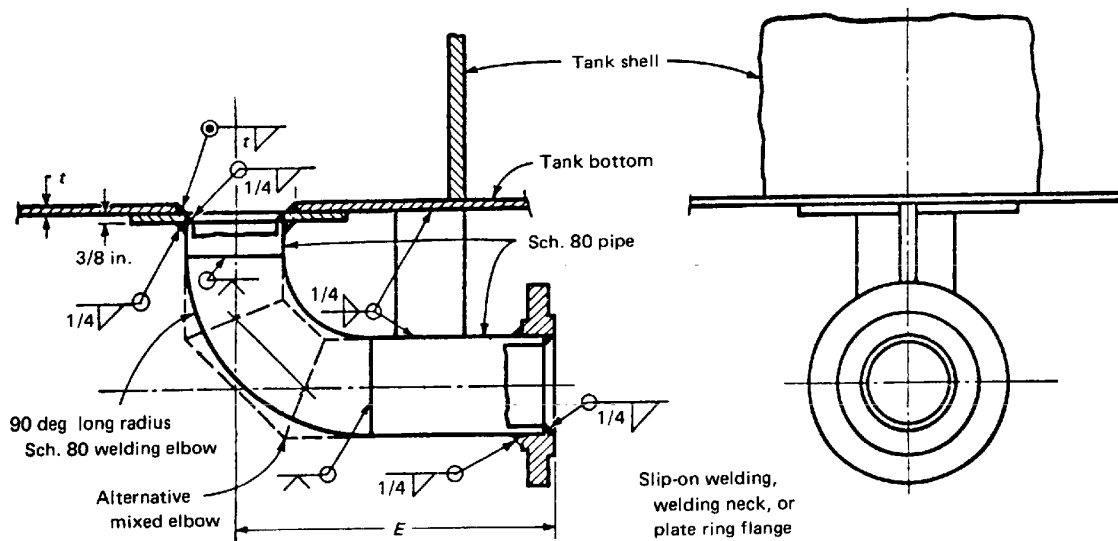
WELDED BOTTOM OUTLET ELBOW
